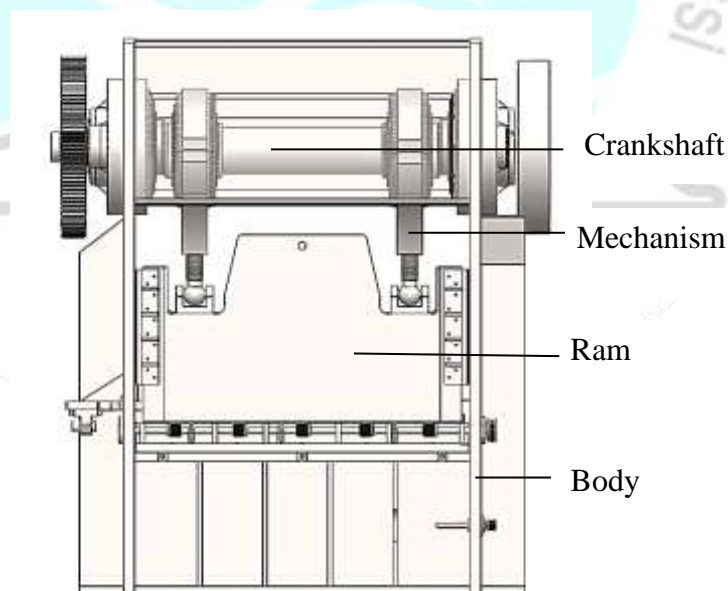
Expanding Metal Press Body and Crank-Slider Mechanism
